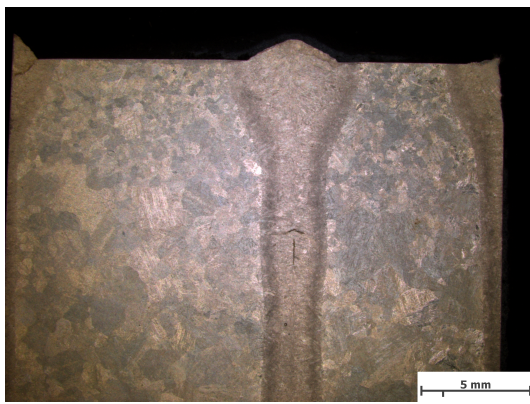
MTP,butt weld E [Adler]:The cross section shows two cracks, one in transverse and one in longitudinal direction in the weld metal zone.
